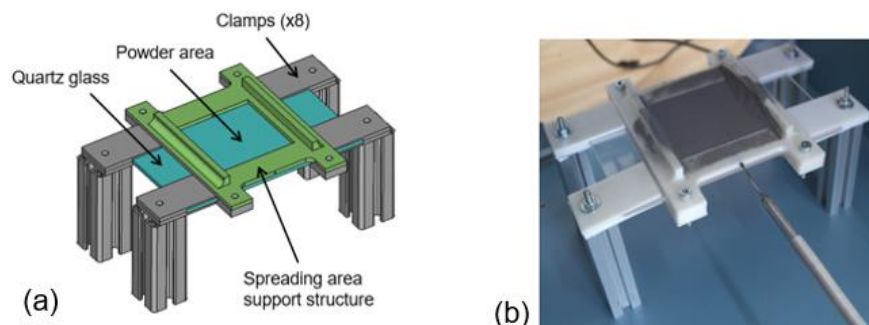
(a) CAD model of lower powder spreading assembly and (b) actual setup with the K-type thermocouple inserted in the powder bed.
